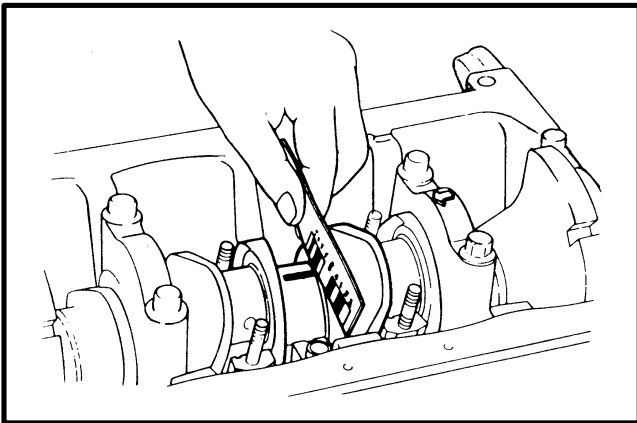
CHECK THE CLEARANCE OF THE CONNECTING ROD BEARINGS
